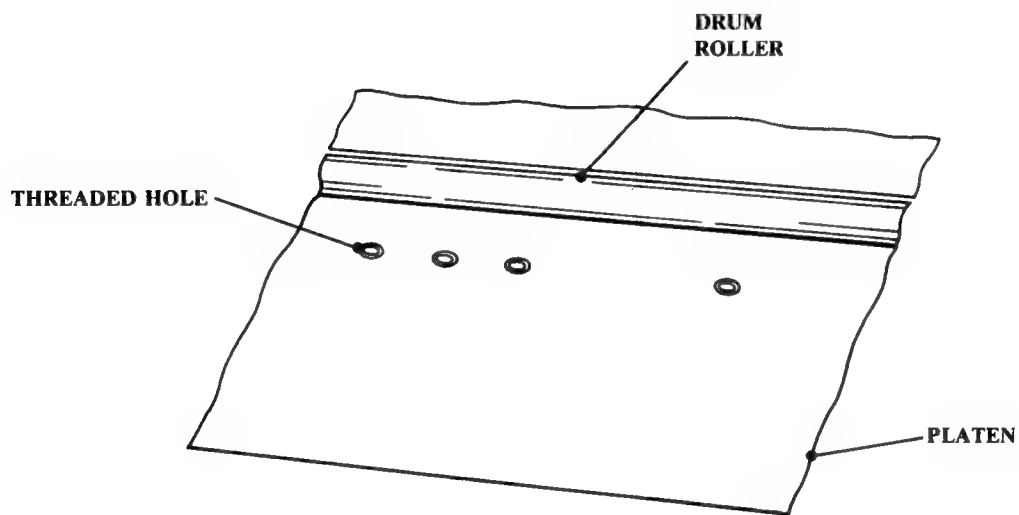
LEFT PINCH ROLLER ASSEMBLY THUMBSCREW
